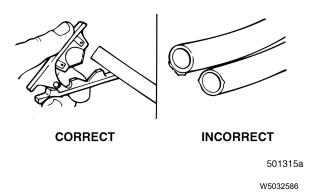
Use a Tubing Cutter for Proper Cut Edges
